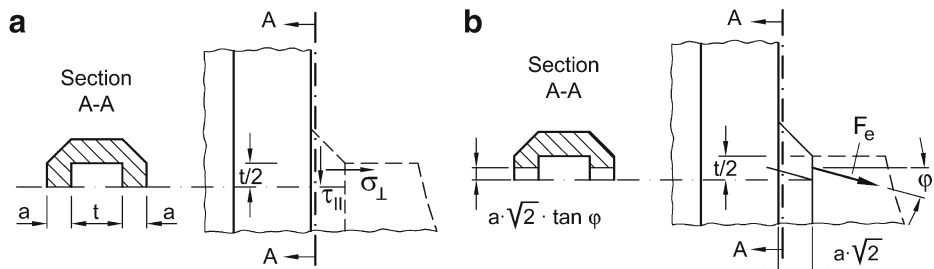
Geometry and loading of the end of an attachment similar to that in Fig. 6
